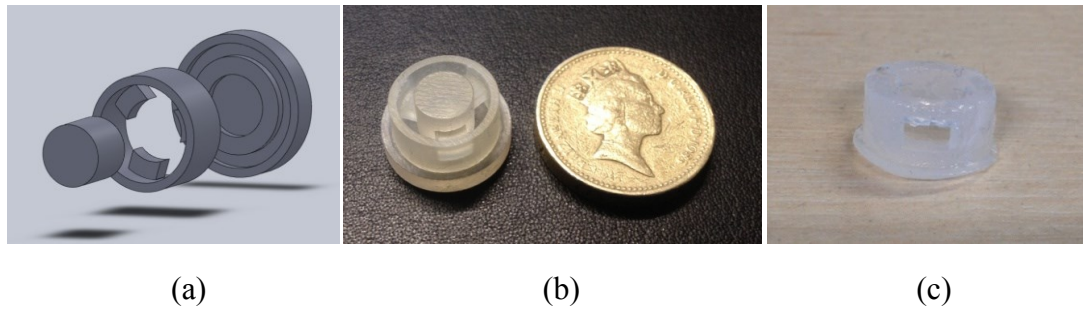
Manufacturing process of silicone model: (a) 3D mould design, (b) mould after 3D printed, (c) flexible silicone structure.
